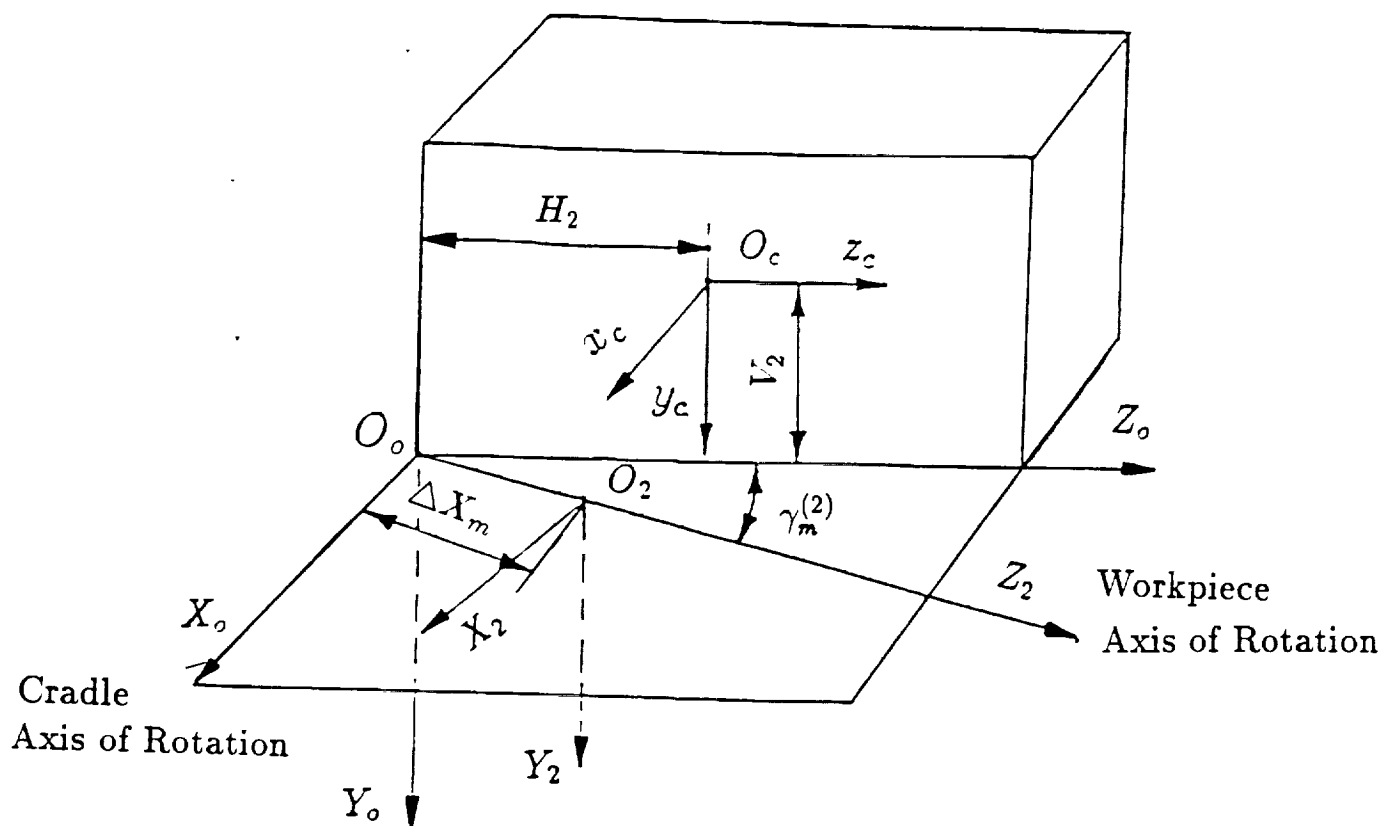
Installment of the Head Cutter with respect to Machine and Workpiece.
